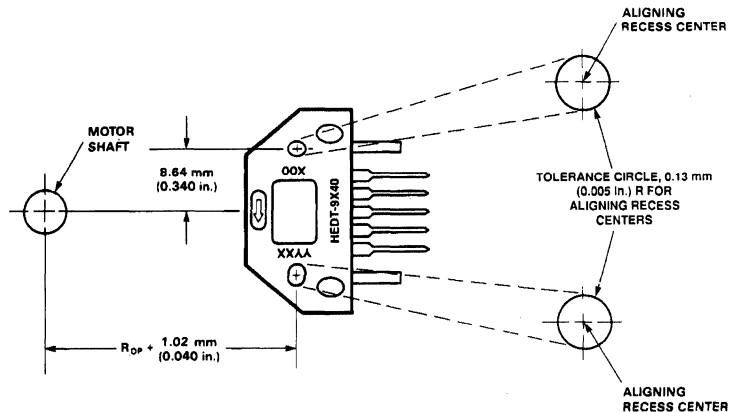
HEDT-9X40 Mounting Tolerance.
